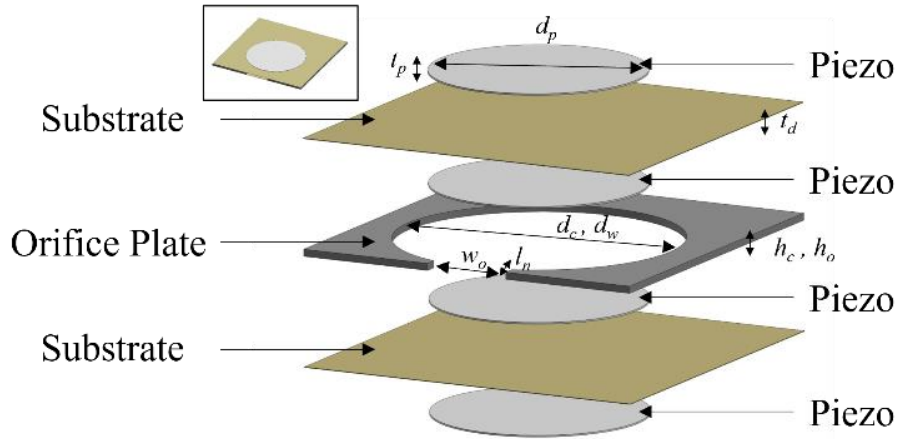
Exploded view of SJA with parts and geometric parameters labelled.
